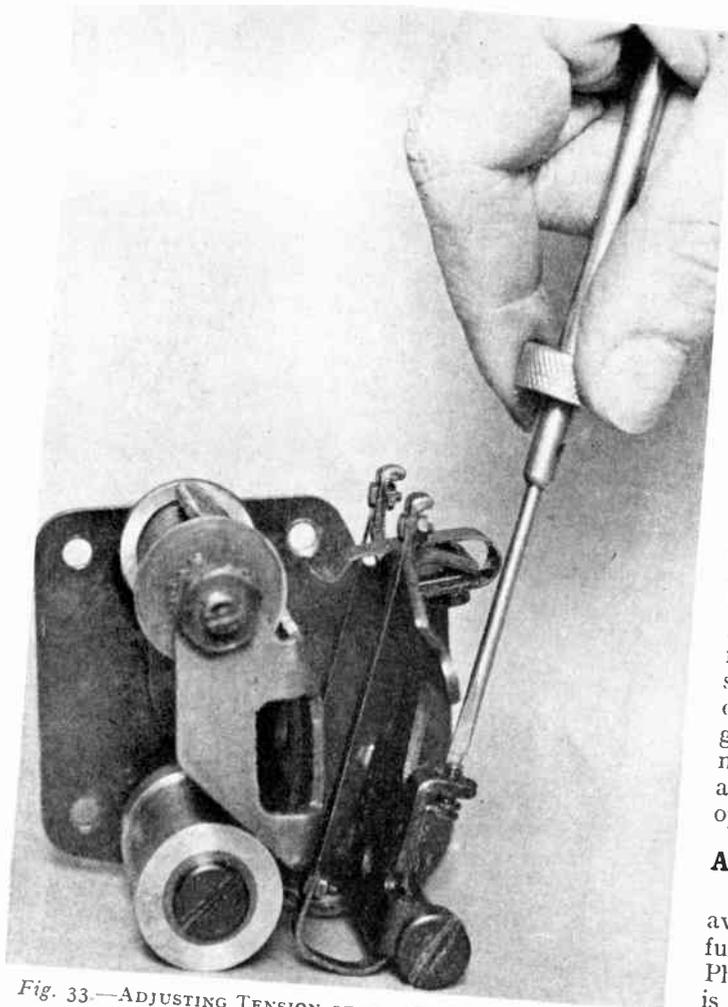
ADJUSTING TENSION OF THE SPRINGS IN THE SOUND-GATE.
